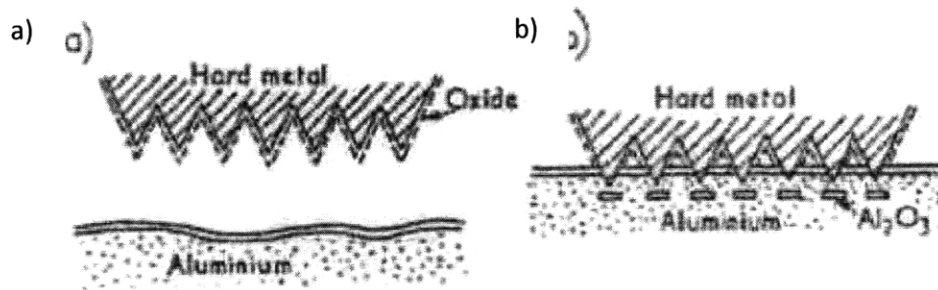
Mechanism of welding a hard metal to Aluminum [36].
